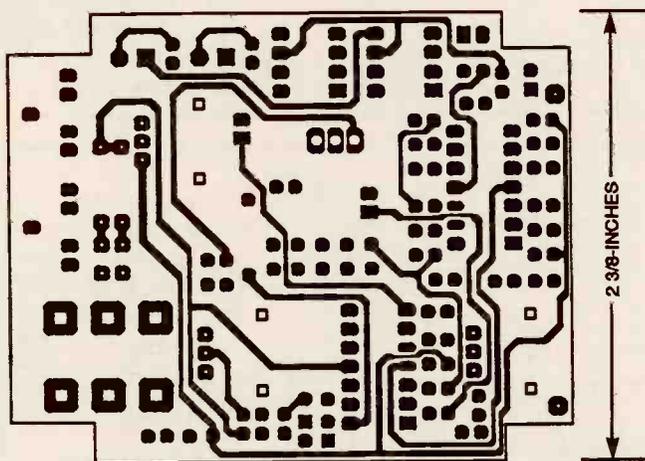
This is the template for the solder side of the PC board. Like Fig. 2, it is also shown full size.
